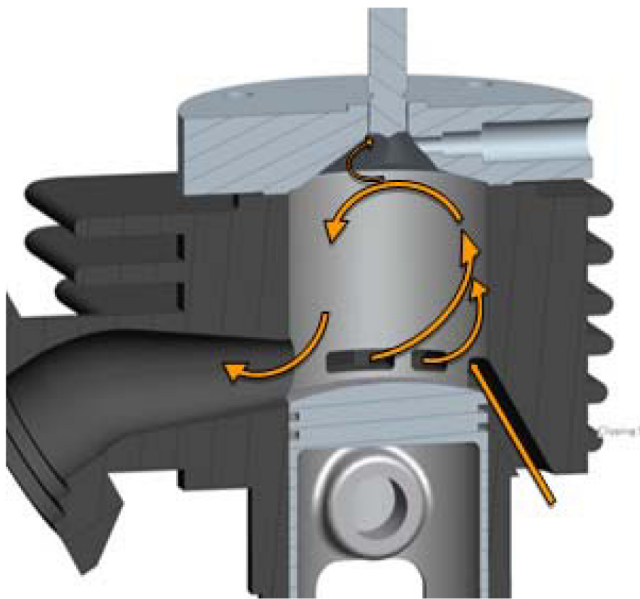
Tumbling flow in a loop scavenged engine. The picture shows the test engine with an asymmetric cylinder head mounted.
